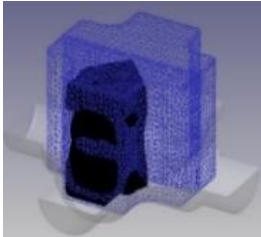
Series of parts constructed to resemble the tooth adapter and the desired part Xa.
